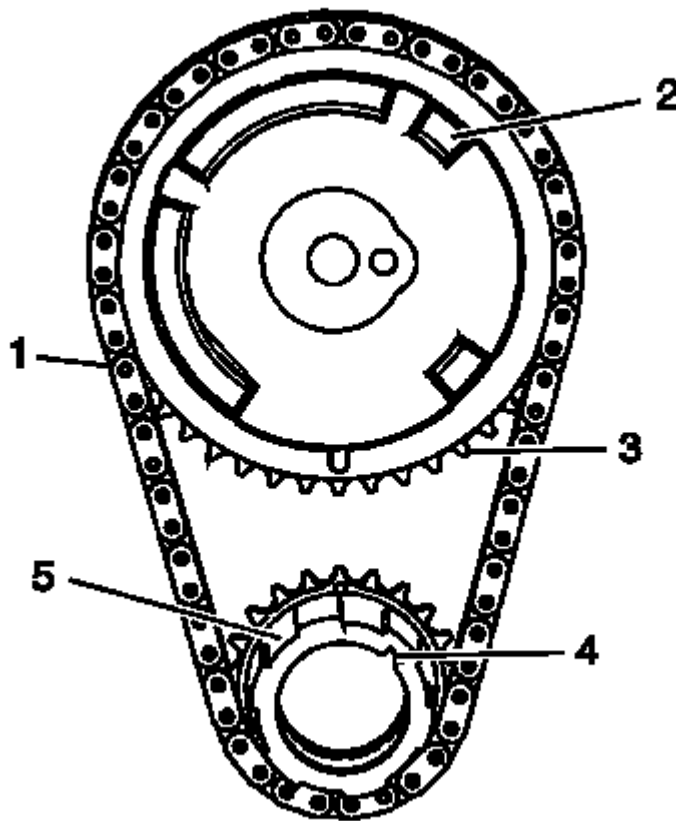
Identifying Timing Chain and Sprockets Inspection Areas
